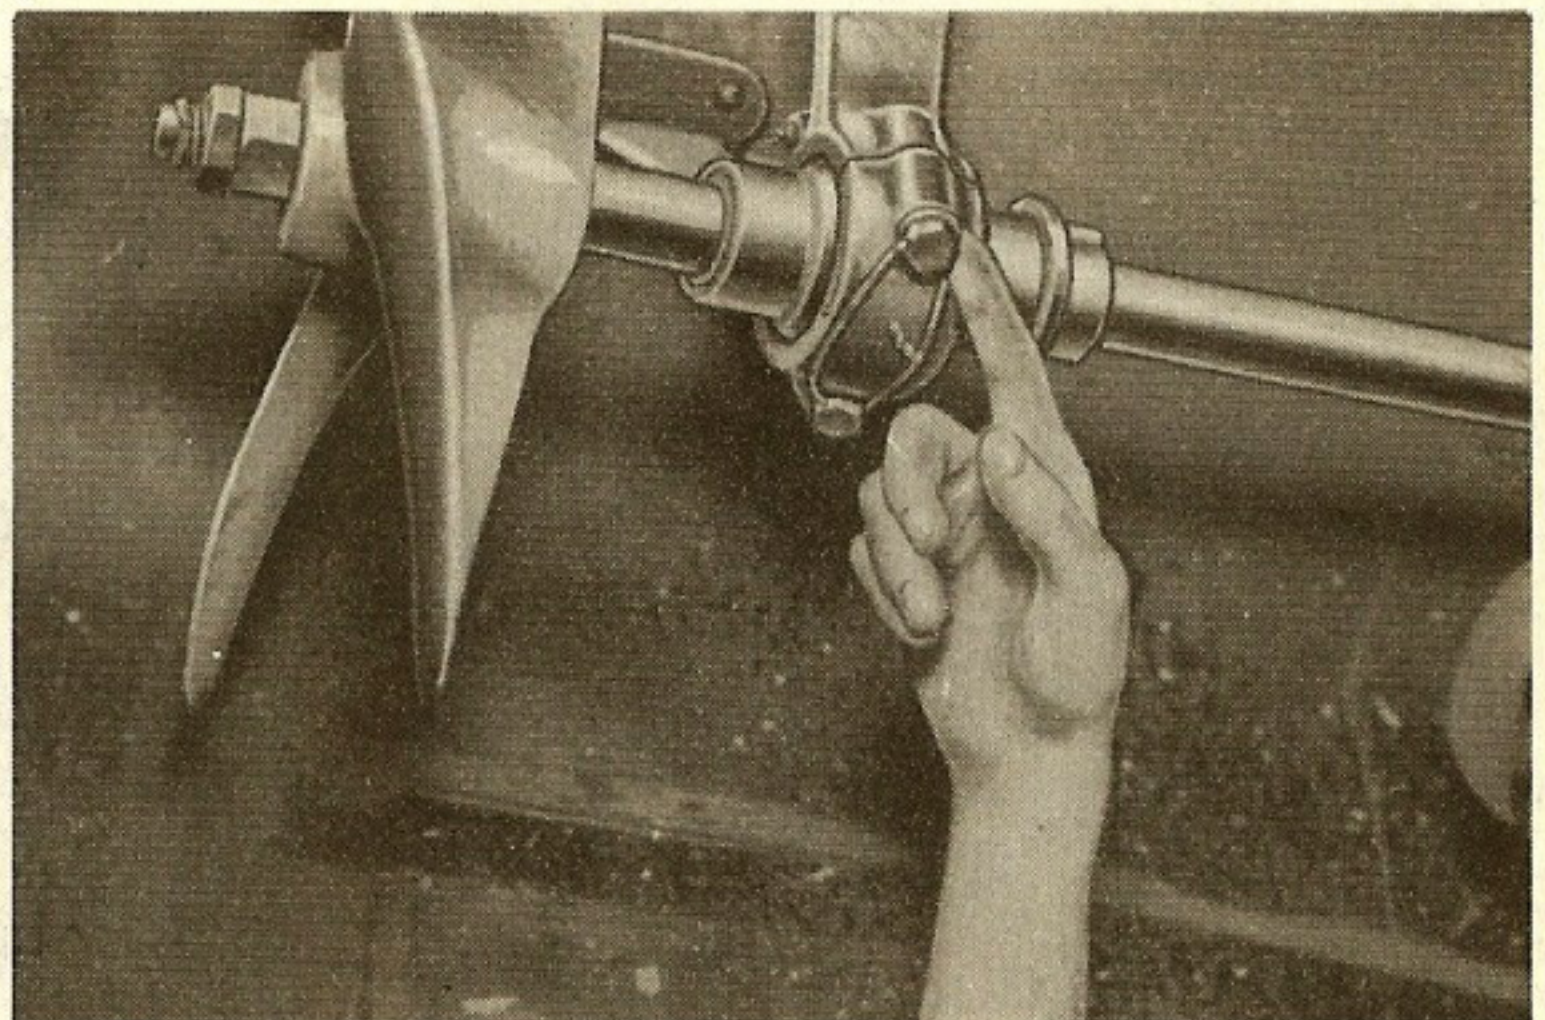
Weld on a chain to keep from losing that bearing cap.
